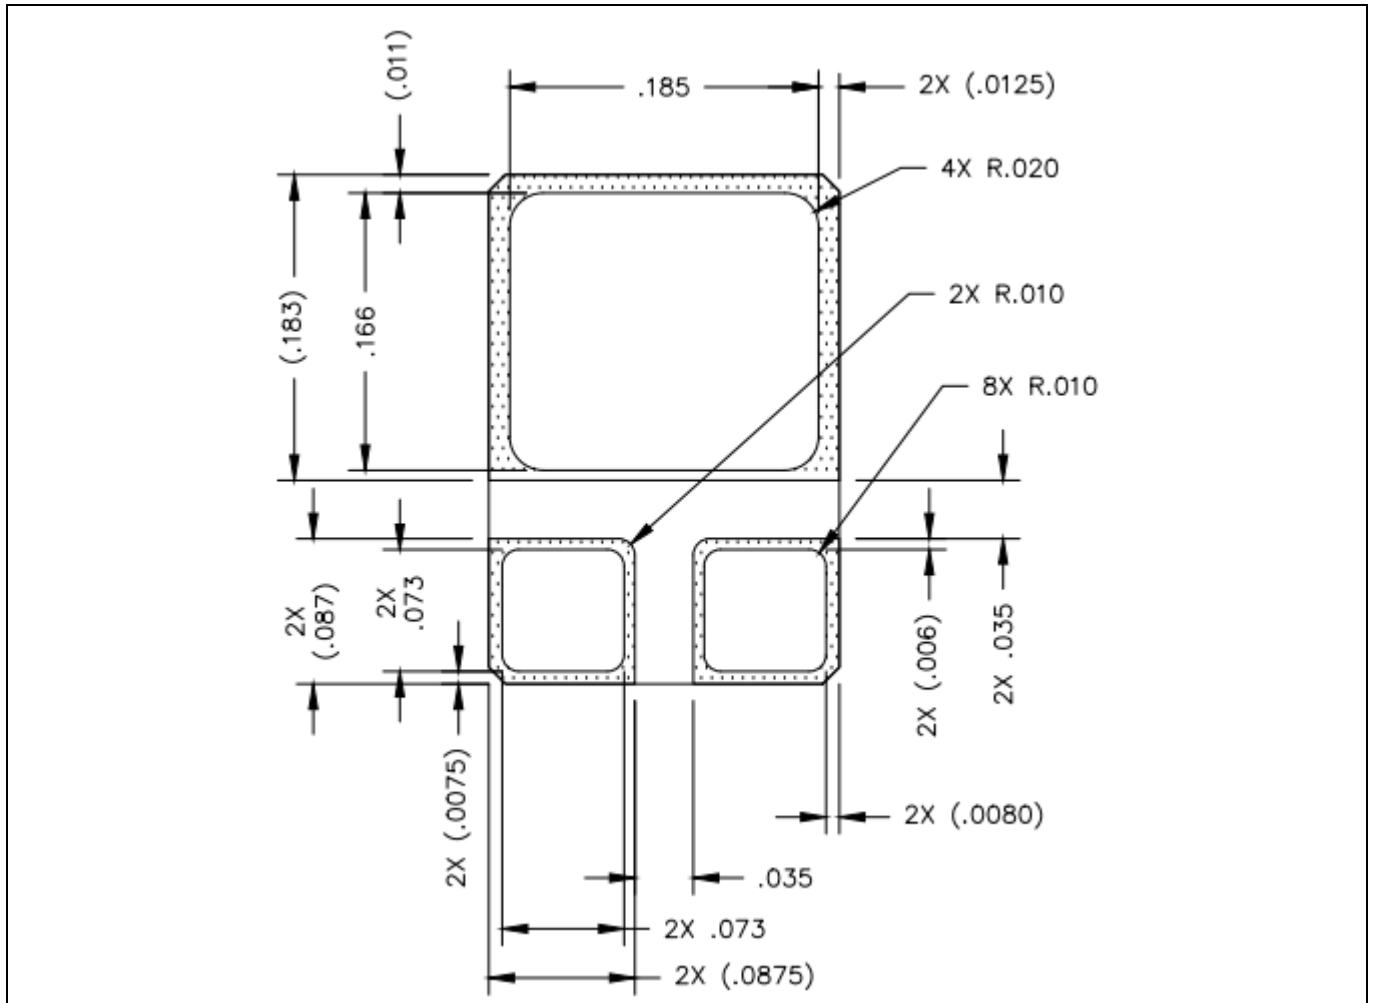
Case outline with dimensions that were used to generate PCB solder pads for SMD-0.2e mounting during PCB-qualification tests, dimensions are in inches
